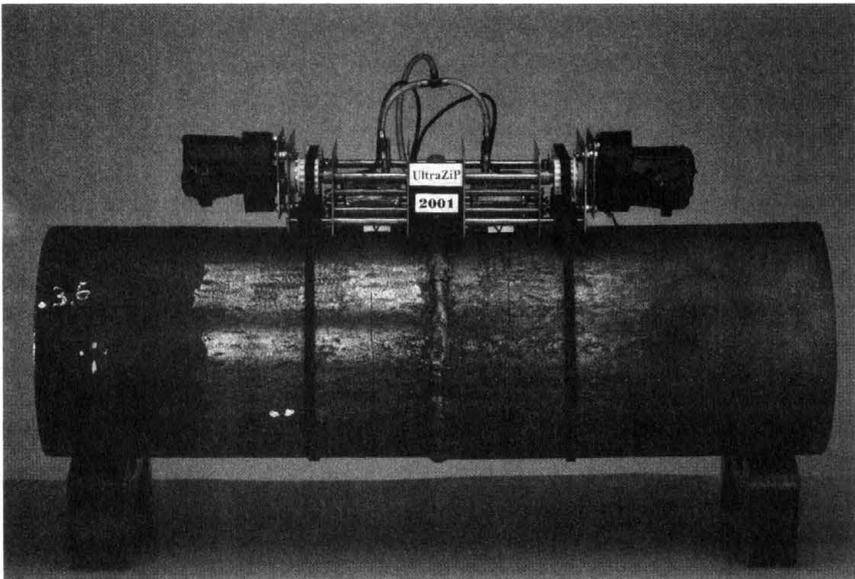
General view of girth weld scanner prototype made for water as acoustic coupling.
